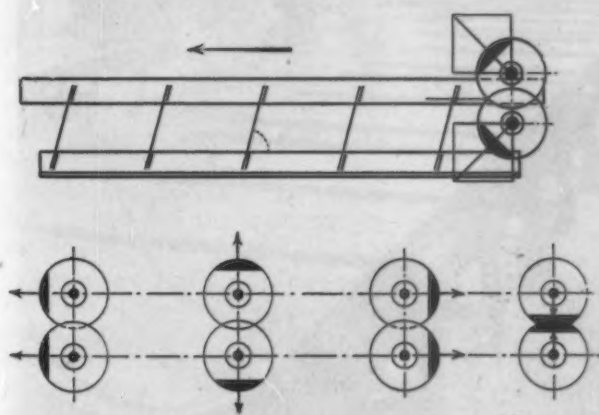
Diagram showing arrangement of vibrating-push conveyor employing improved unbalanced drive. The trough (the upper member) is coupled to several unbalanced wheels and is supported by inclined members that are fastened to the base. The oscillating movement of the drive is transferred to the trough and converted into a throwing motion by means of the inclined members. Small but rapid movement of the trough results in an almost flowing movement of the material.
